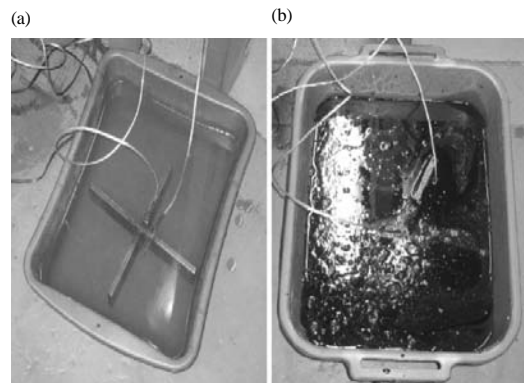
Cooling process of test pieces: a) Water and b) Oil
